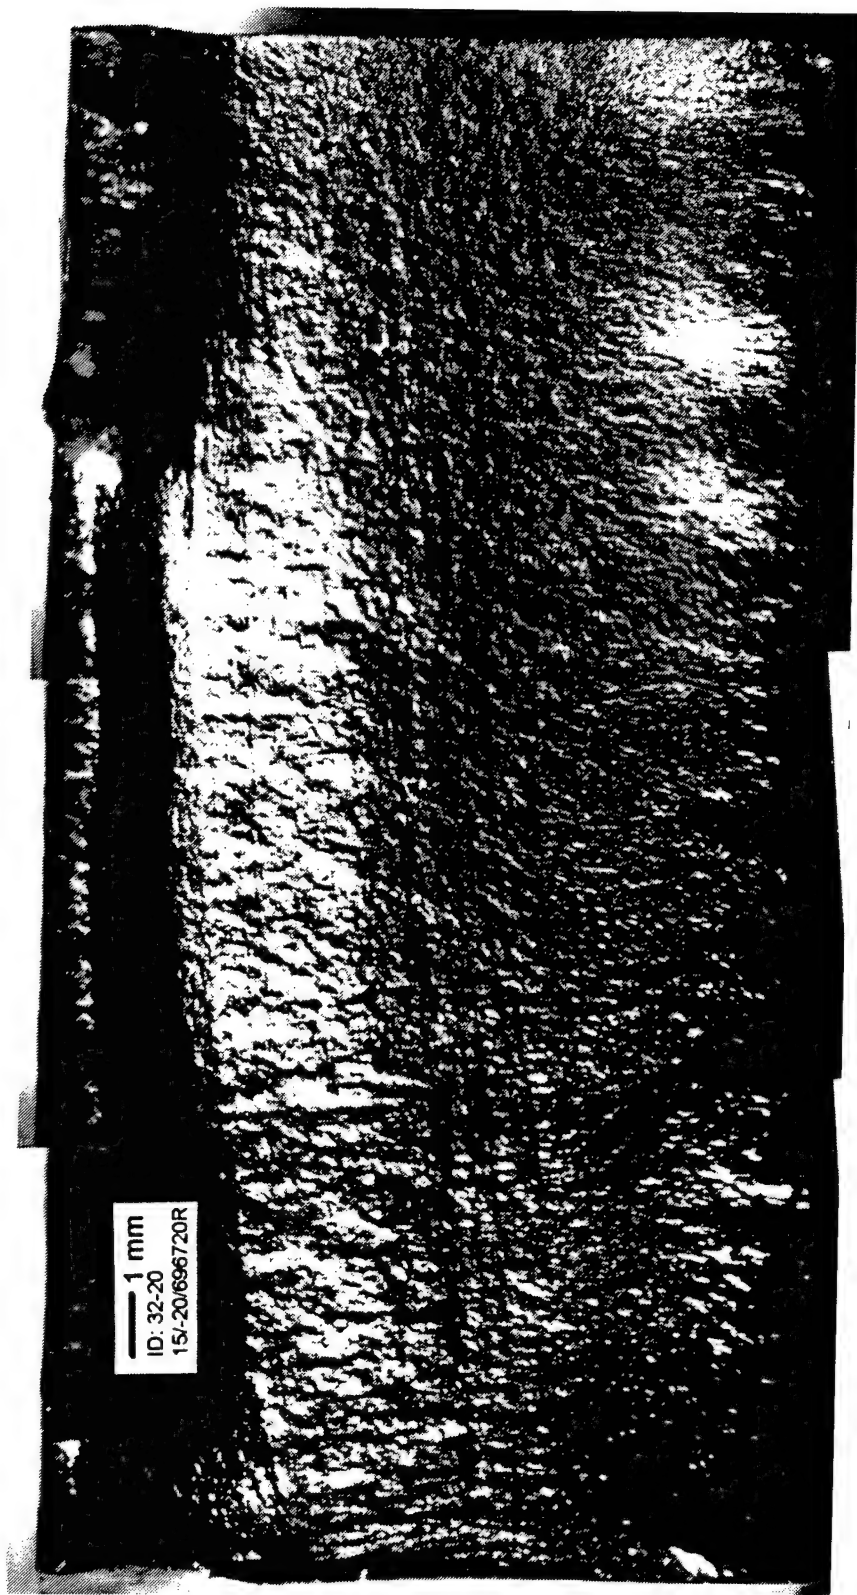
Fatigue fracture surface of the HSLA-80 but weld sample subjected to random loading:
